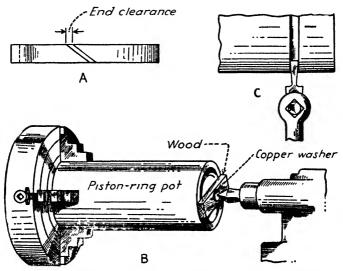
Cutting rings from a pot casting. (Courtesy of Power.)
